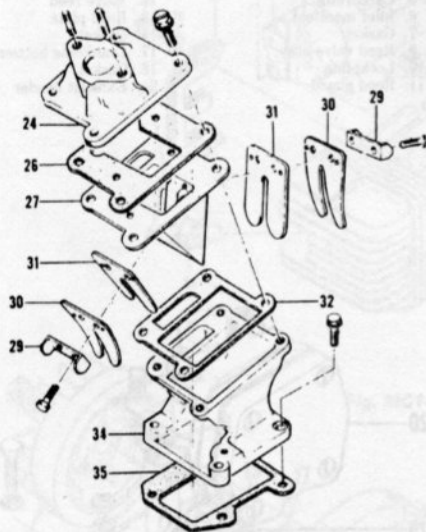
Reed inlet valve installation used on Model MC-30. Two sets of reed valves are used to increase intake capacity. Installations on dual carburetor MC-40 and MC-70 models are similar. Refer to Fig. MC22.
